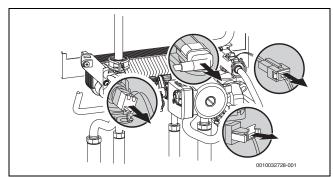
Unplugging electrical connections / removing hose from safety relief valve
